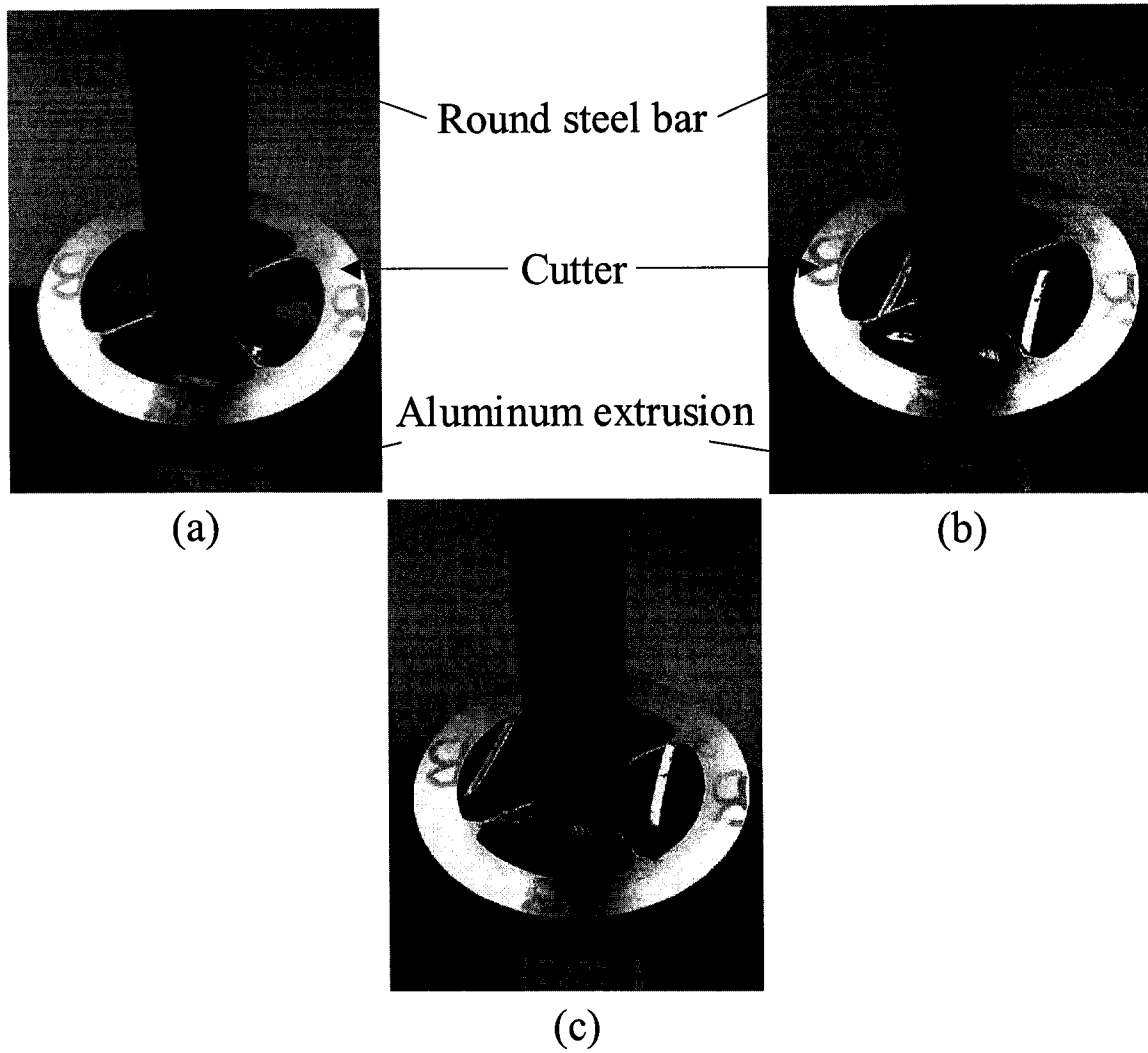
Cutting test setup. (a) Setup of the test prior to axial crushing, (b) penetration of blades of cutter into aluminum extrusion commencing on specimen SA2, (c) cutting in progression.
